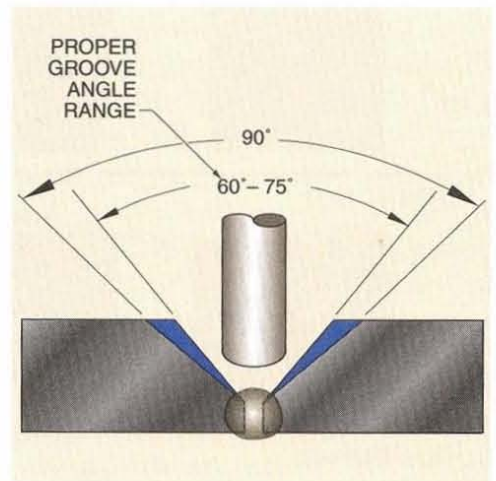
An overly large groove angle wastes filler metal and time, resulting in greater welding costs.
